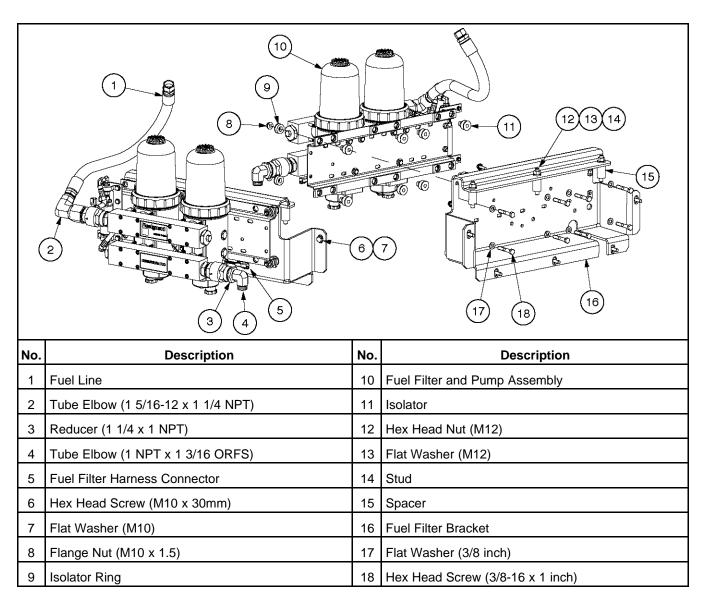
FUEL FILTER KIT INSTALLATION (DUAL FILTER SHOWN)
